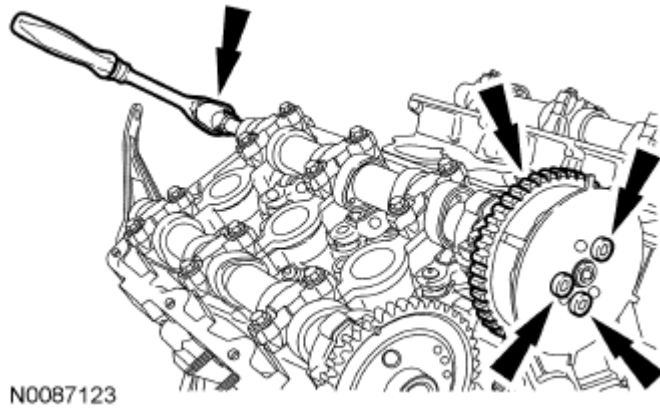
Locating RH Camshaft Phaser & Sprocket Bolts
